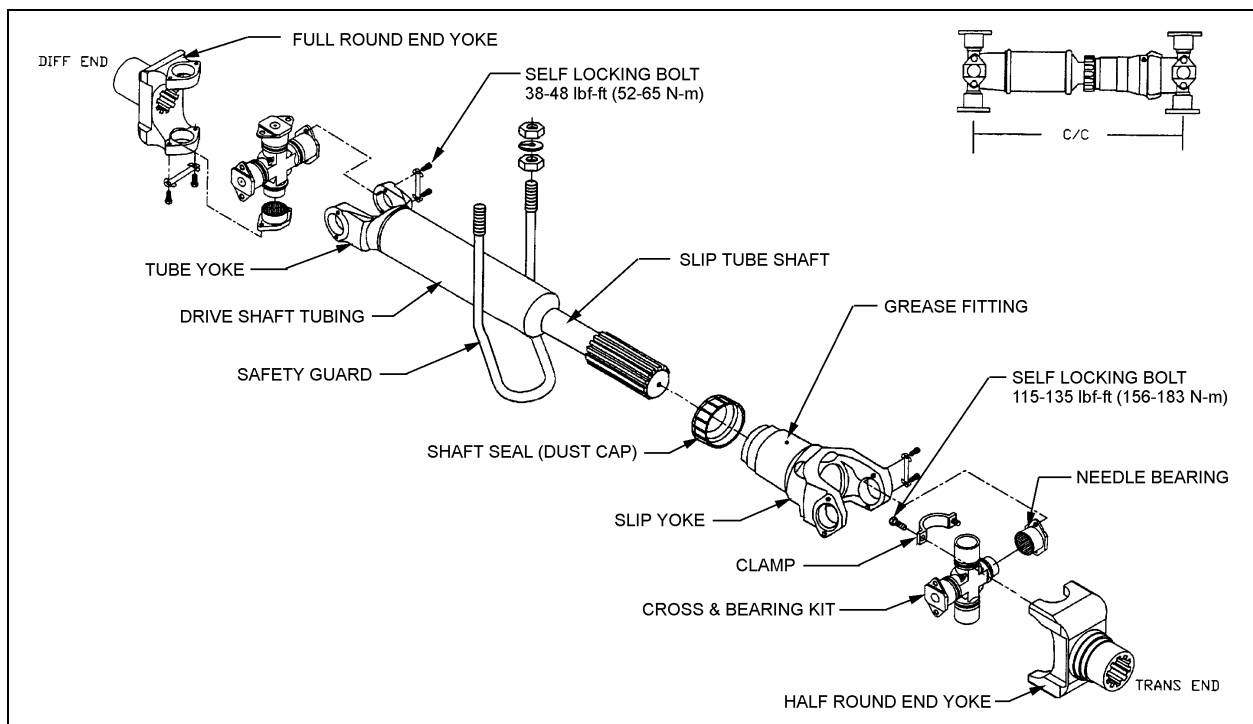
PROPELLER SHAFT ASSEMBLY
